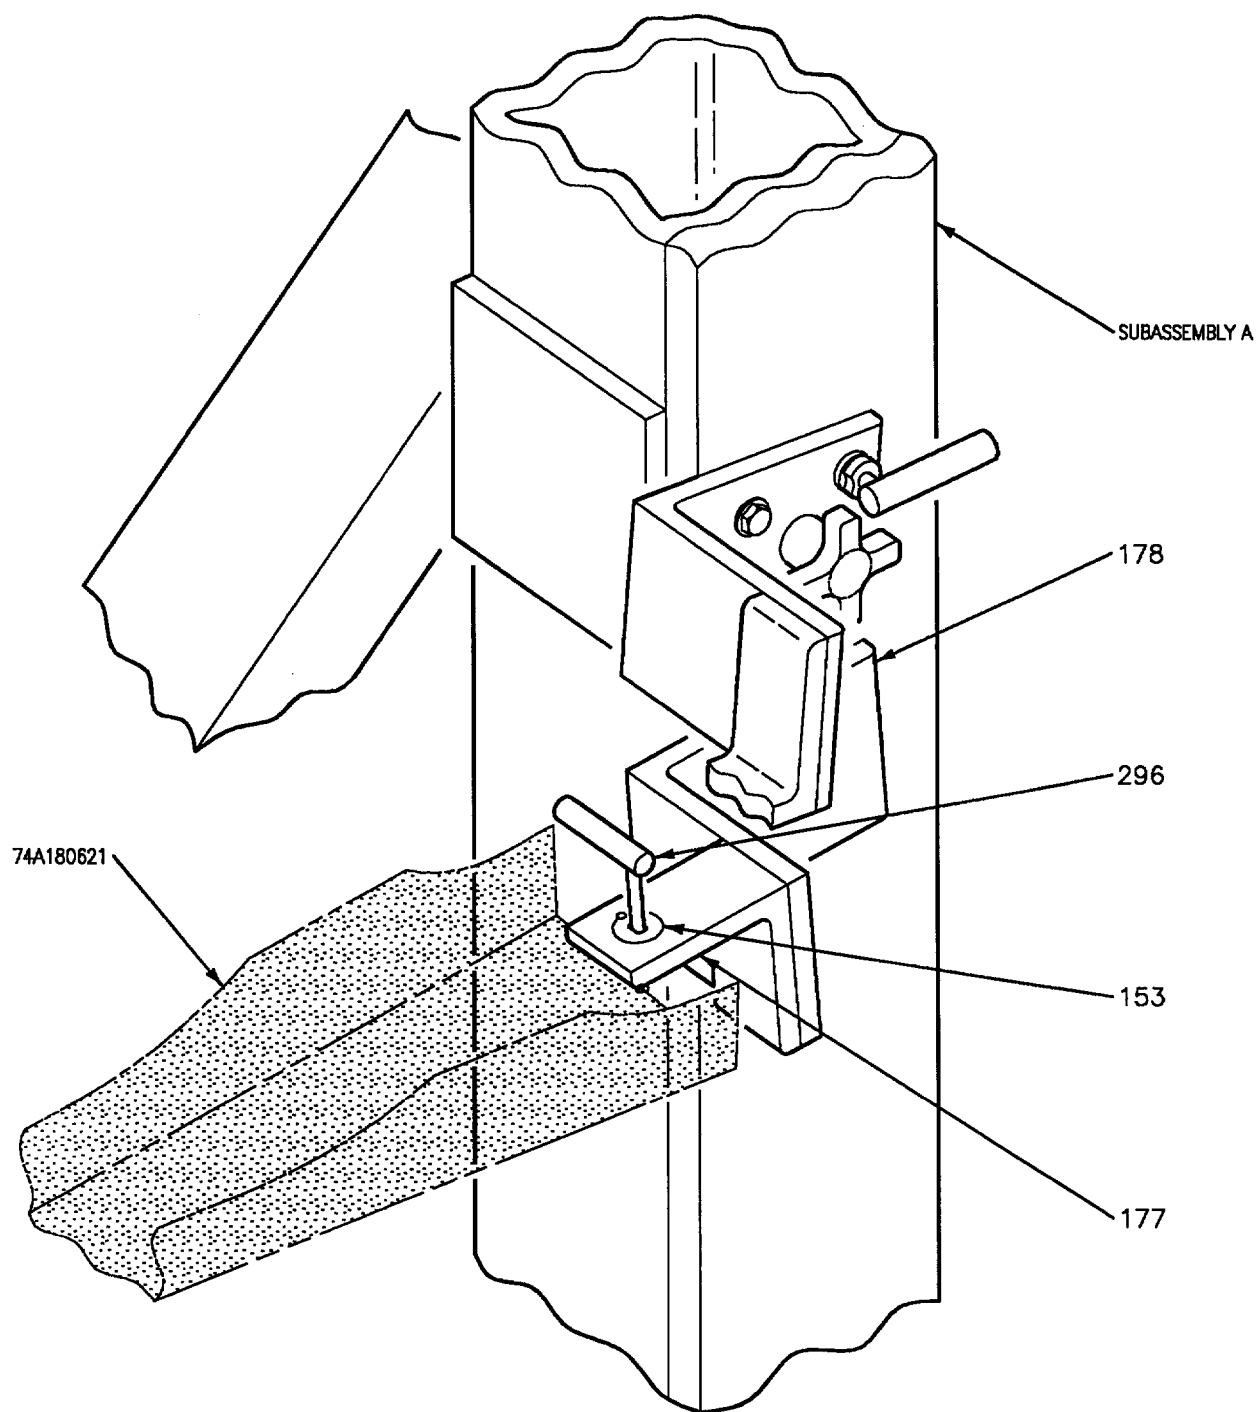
Cellular Core Assembly, 74A180621 (Sheet 1)
